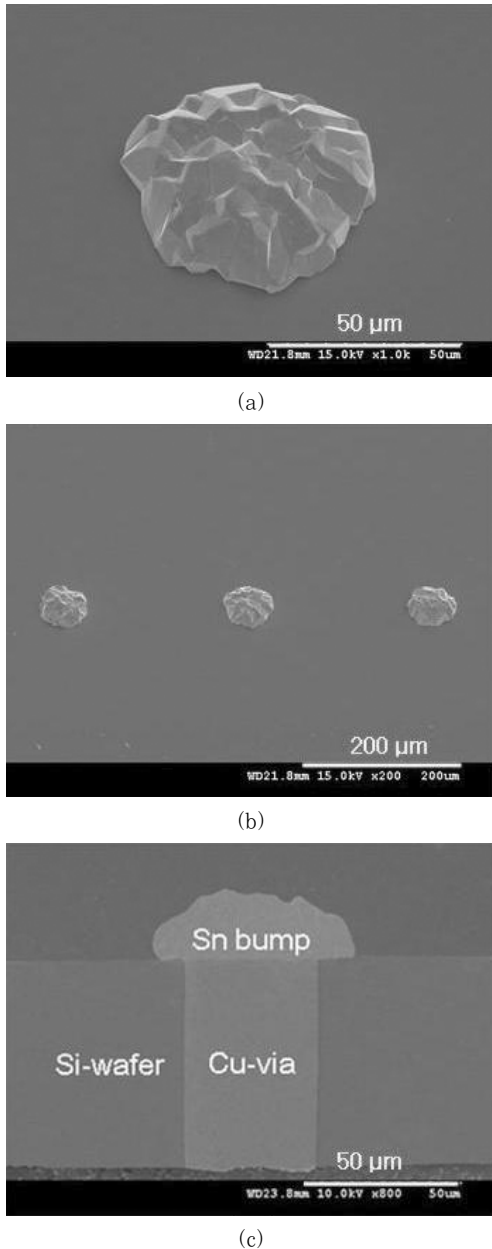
Sn bumps formed on the Cu filling by DC electroplating without PR mould, (a) bump appearance, (b) bumps having good uniformity, and (c) cross section of a bump⁷⁾
